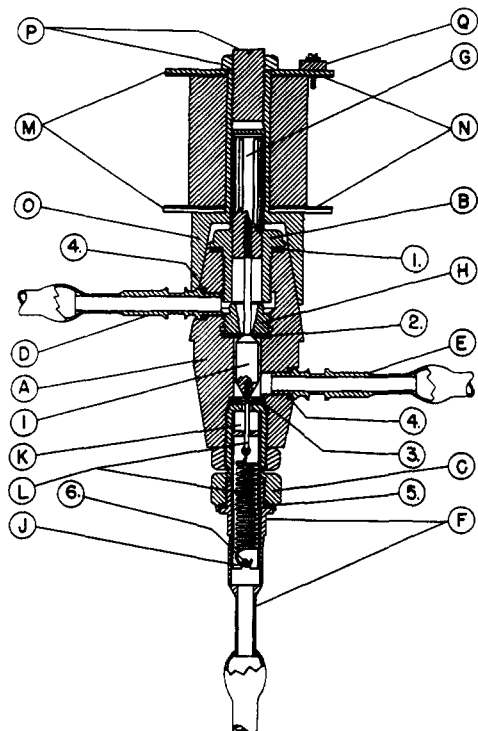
Three-way solenoid valve: A, valve body; B, core vacuum seal; C, outlet sealing plug and lock nut; D, normal output tube; E, input tube; F, valve outlet tube; G, solenoid core (pure iron, chromium plated); H, plunger stop; I, valve plunger; J, spring tension tube; K, guide; L, valve opening mechanism; M, pure iron disks; N, bakelite disks; O, solenoid base (brass); P, core stop and nut; Q, terminal block; 1, gasket ("Teflon"); 2, upper plunger seat ("Teflon"); 3, lower plunger seat (gold); 4, gasket ("Teflon"); 5, gasket ("Teflon"); 6, spring hanger. All parts are of stainless steel unless otherwise indicated.
